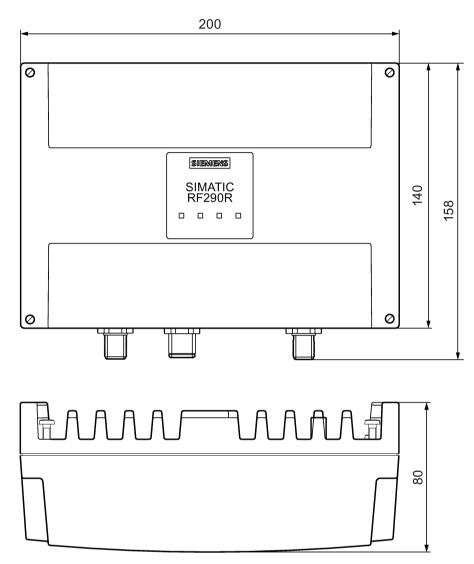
Dimensional drawing RF290R (dimensions in mm)
